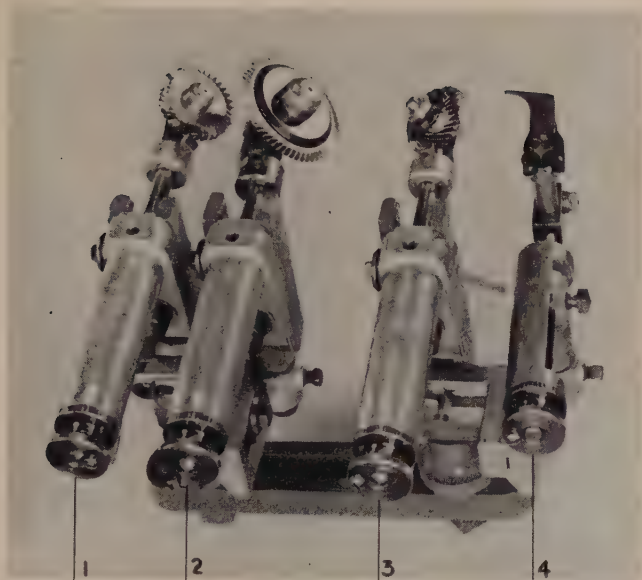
Arrangement for single plush with single backing: (1) plush feeder bur; (2) clearing bur; (3) sinker bur; (4) plain presser.
